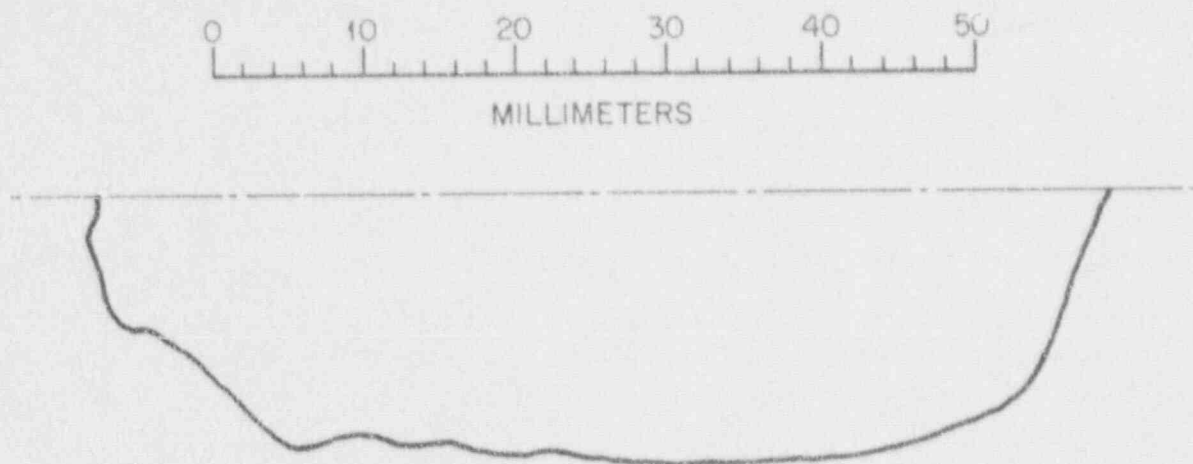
Initial electron beam weld flaw in unclad plate CP-22.
